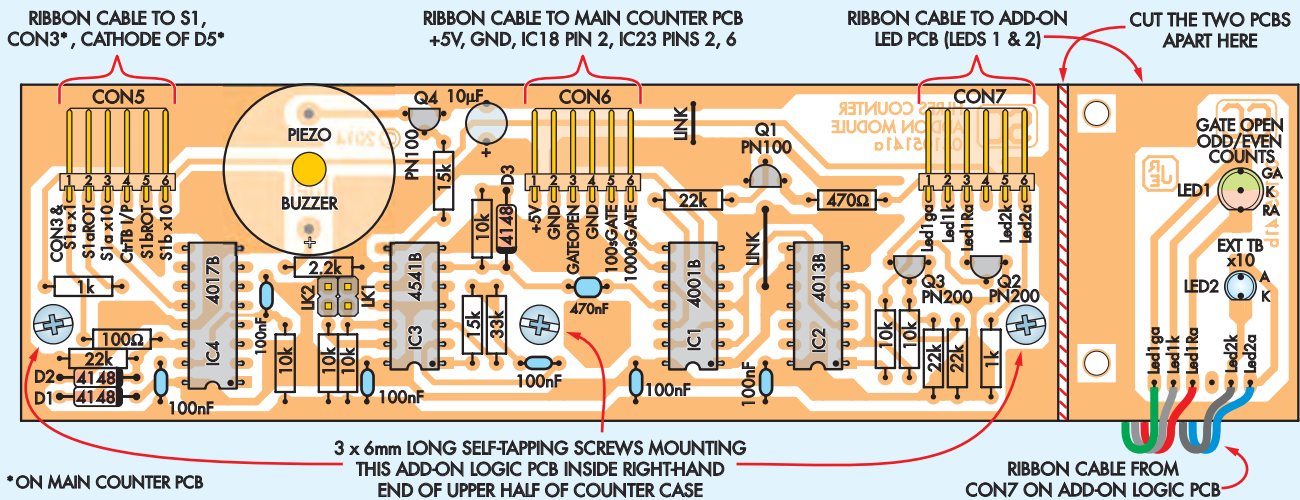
cut the PCB into two sections as indicated, before installing the parts on the two modules. Make sure that all polarised parts are correctly oriented and be careful not to get the ICs mixed up. The photo opposite right shows the completed add-on logic module mounted in place on the case lid.
